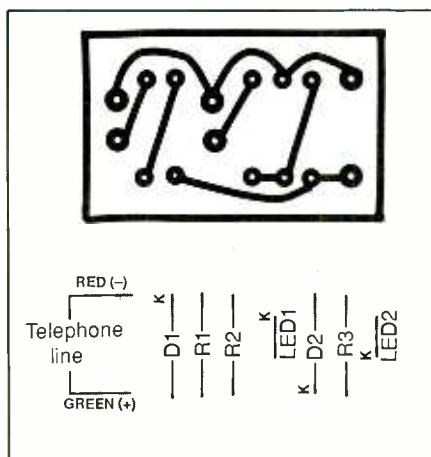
Actual-size etching-and-drilling guide (A) and wiring diagram (B) for Telephone-Line Checker pc board.
